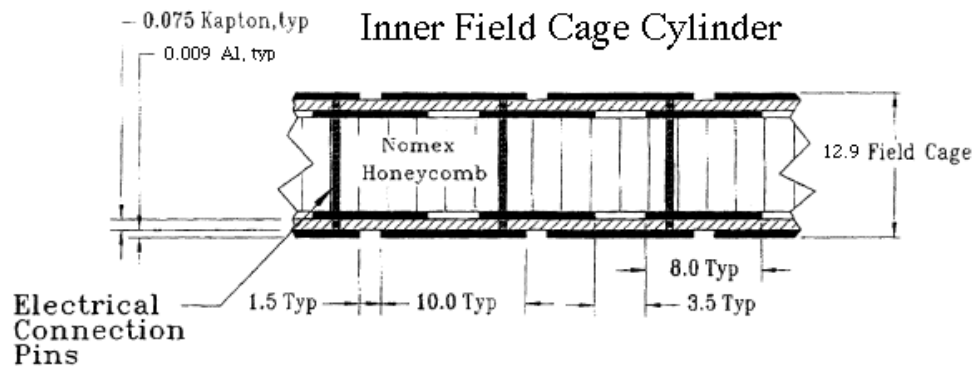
Inner Field Cage structure. Dimensional units are in millimeters.
